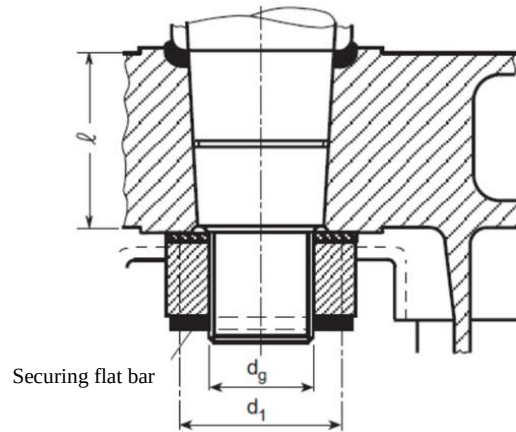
Cone couplings with special arrangements for mounting and dismounting the couplings
